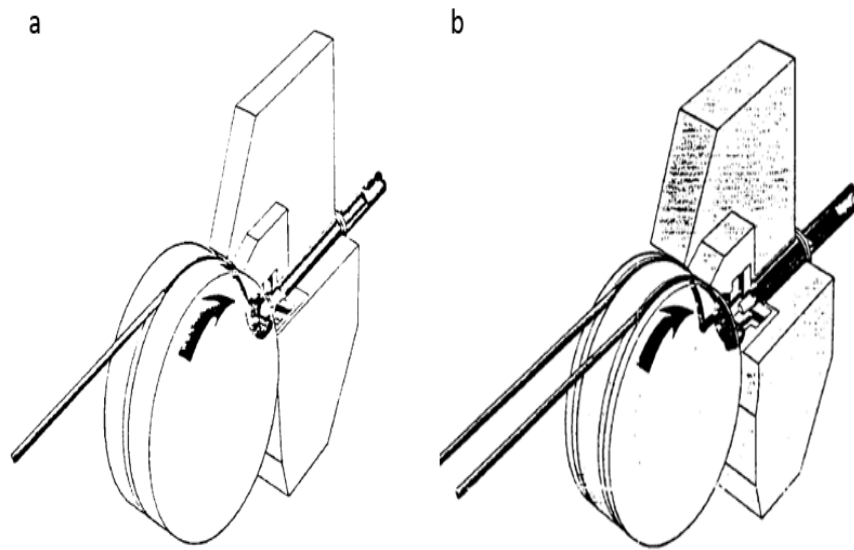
a) Single groove CRE b) Twin groove CRE. [20]
